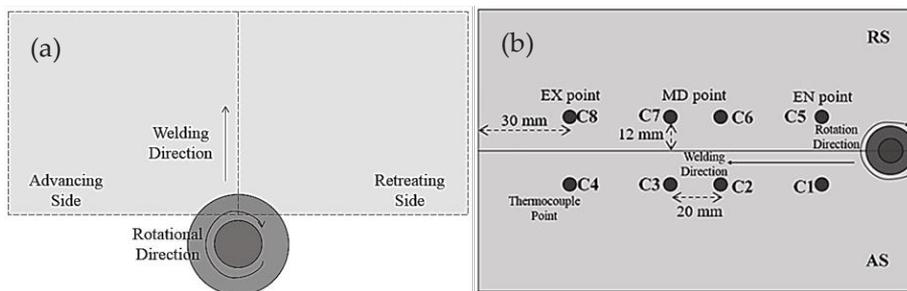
Process setup with (a) rotational direction, ω is clockwise during the process and (b) location of thermocouple along the welding path
